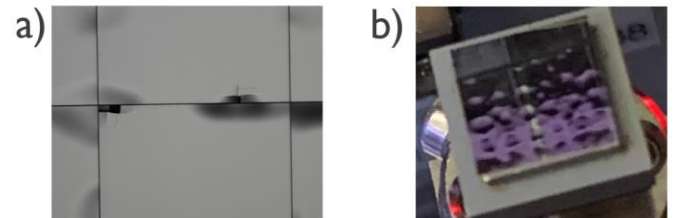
a) Damaged 10 μ m thin die on glass carrier after partial laser release process. b) 10 μ m thin die deformed by vacuum of pickup tool in die bonder
